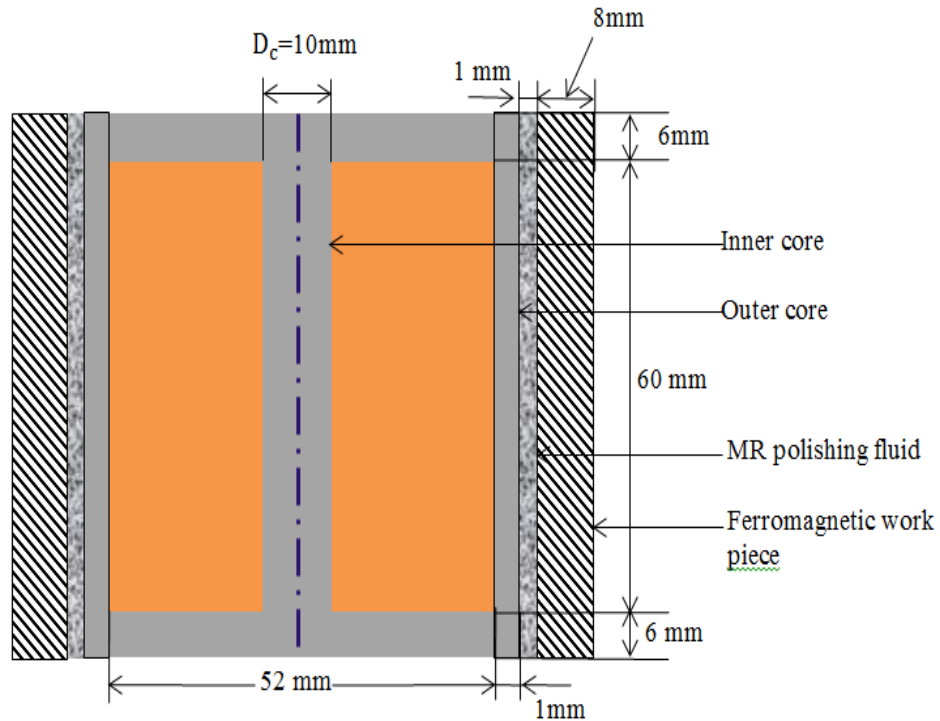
Geometric presentation of Magnetorheological Honing Tool with Ferromagnetic Workpiece
